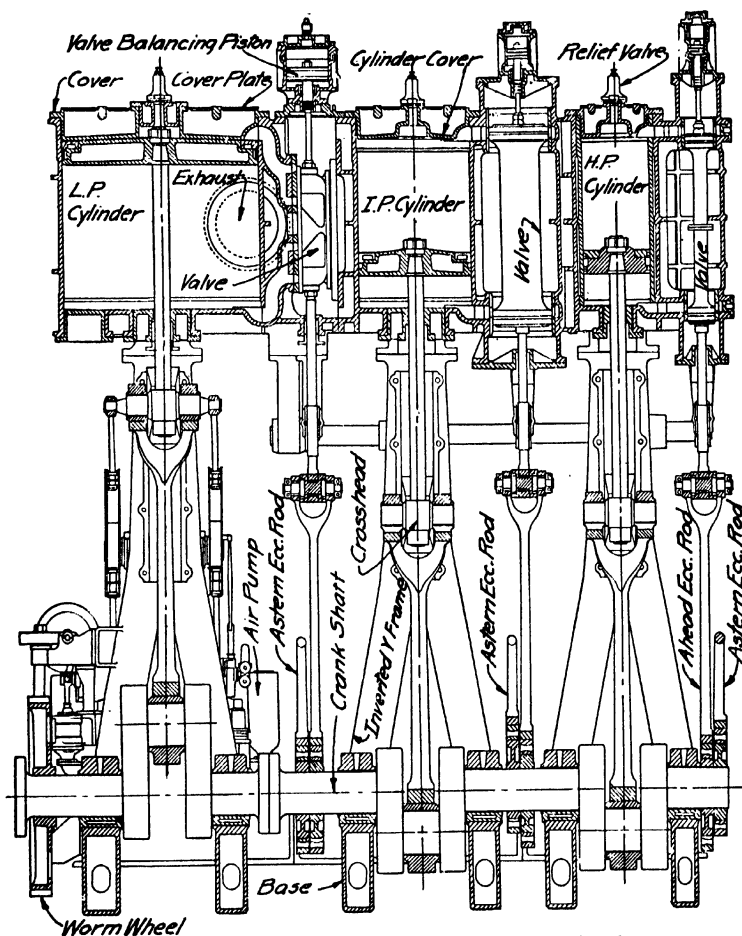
Vertical Section thru Engine shown in Fig. 263.
